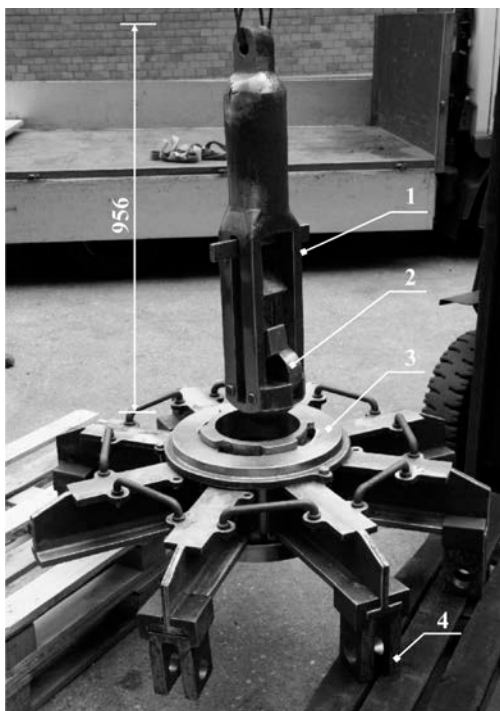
The equipment for the heat treatment of parts of the aircraft chassis [3]: 1 – body with transport hook, 2 – latch, 3 – sling, 4 – clip for fastening of heat treated parts
